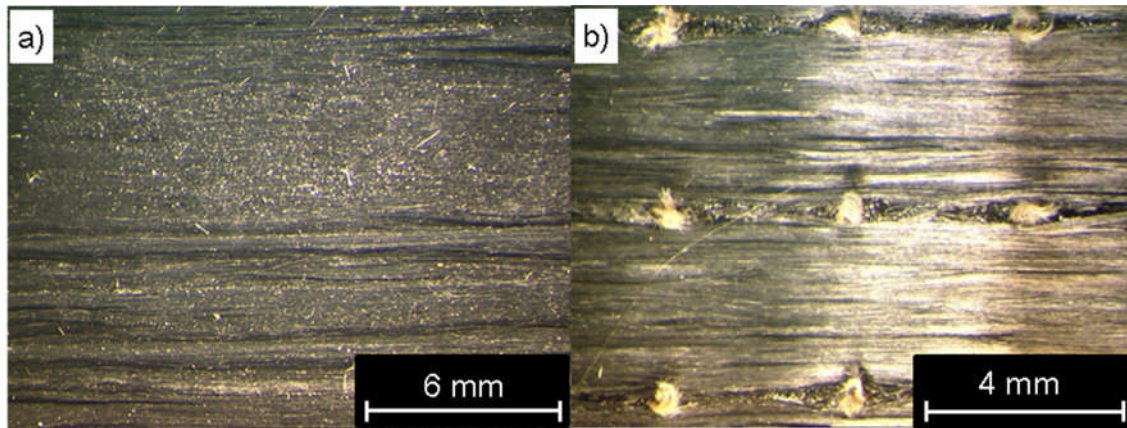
Fracture surface of highly bindered specimens: a) untufted control and b) aramid tufted for a tufting depth of 4 mm.
